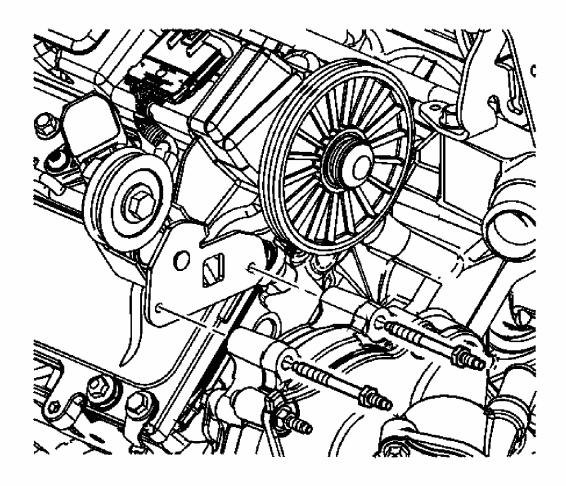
Identifying Water Pump Drive Belt Tensioner Courtesy of GENERAL MOTORS CORP.
